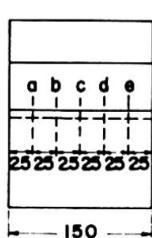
LAMELLAR TEARING TEST SPECIMEN
